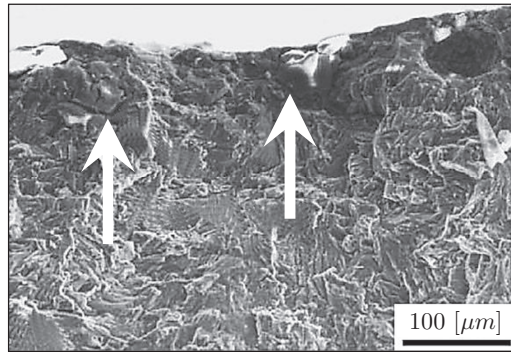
Fatigue fracture surface showing defects near a weld toe notch of a DS T-joint (Sidhom et al., 2005).
